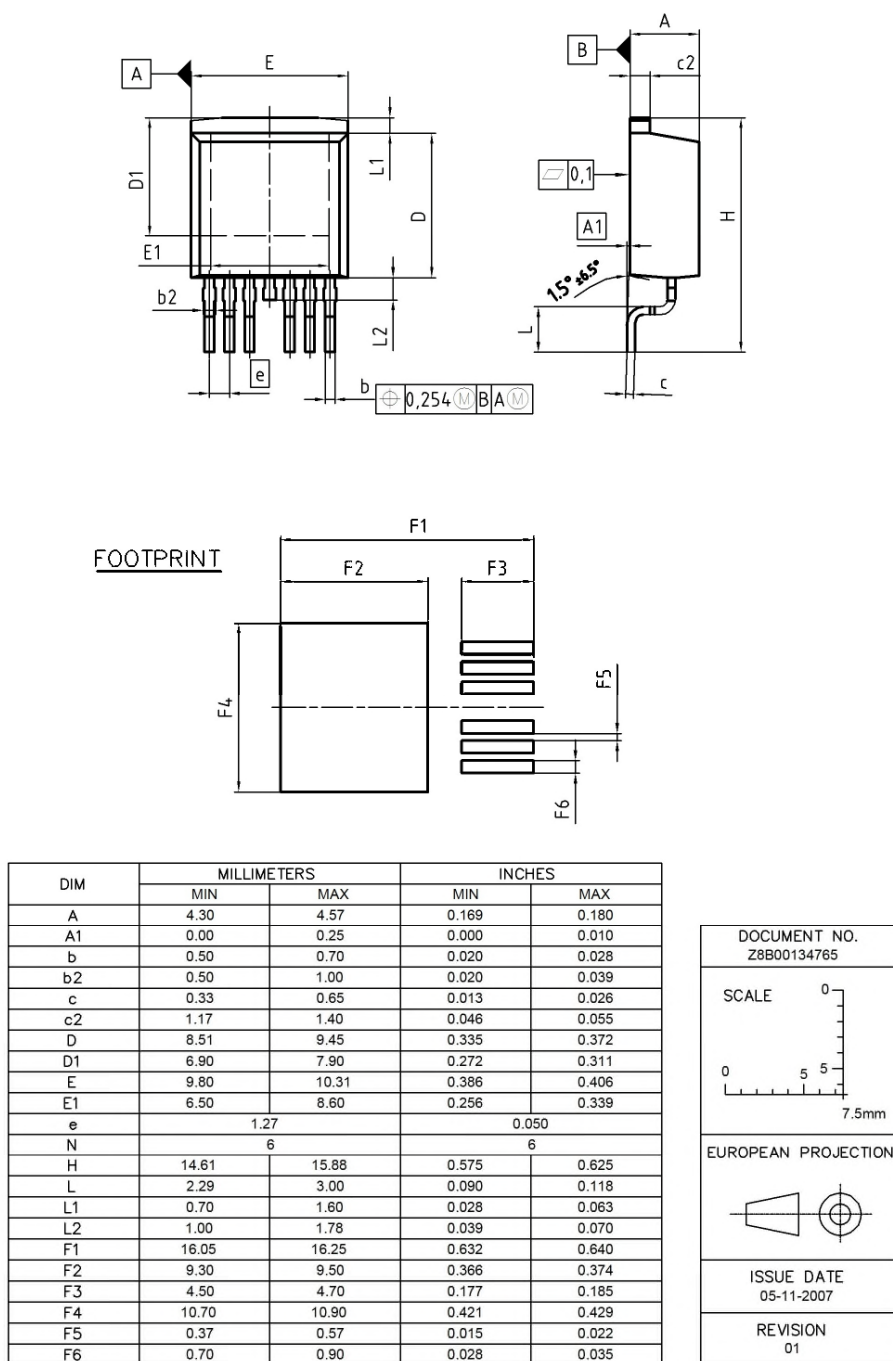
Outline PG-TO263-7, dimensions in mm/inches
